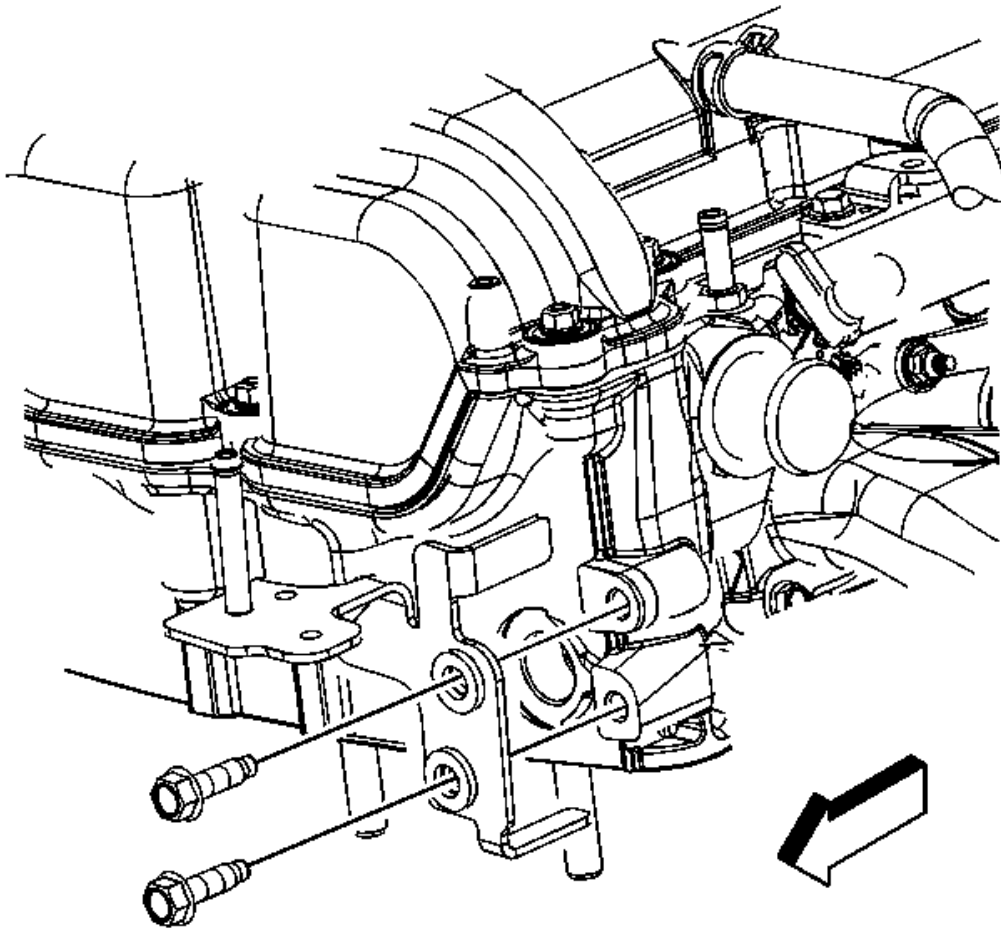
View Of Intake Manifold Cover Bracket & Bolts
